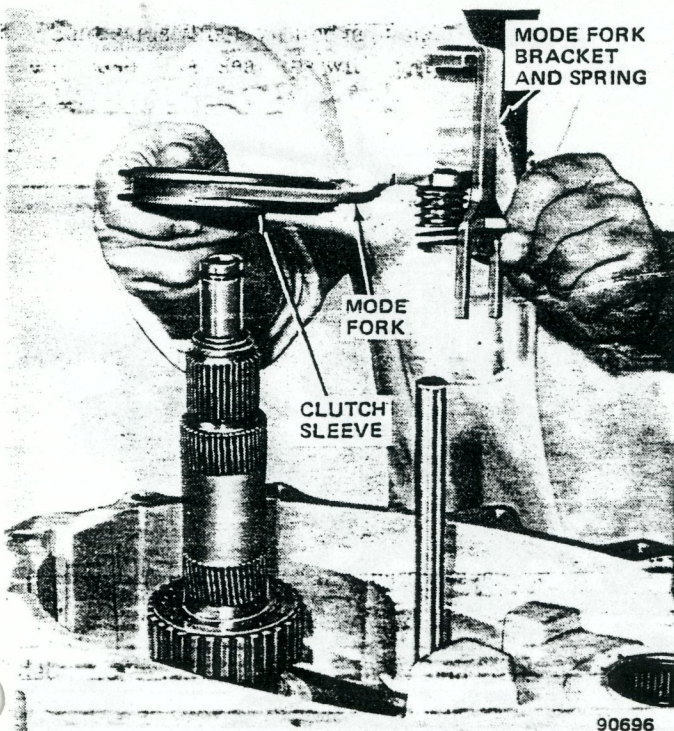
D-56 Clutch Sleeve and Mode Fork Removal/Installation
